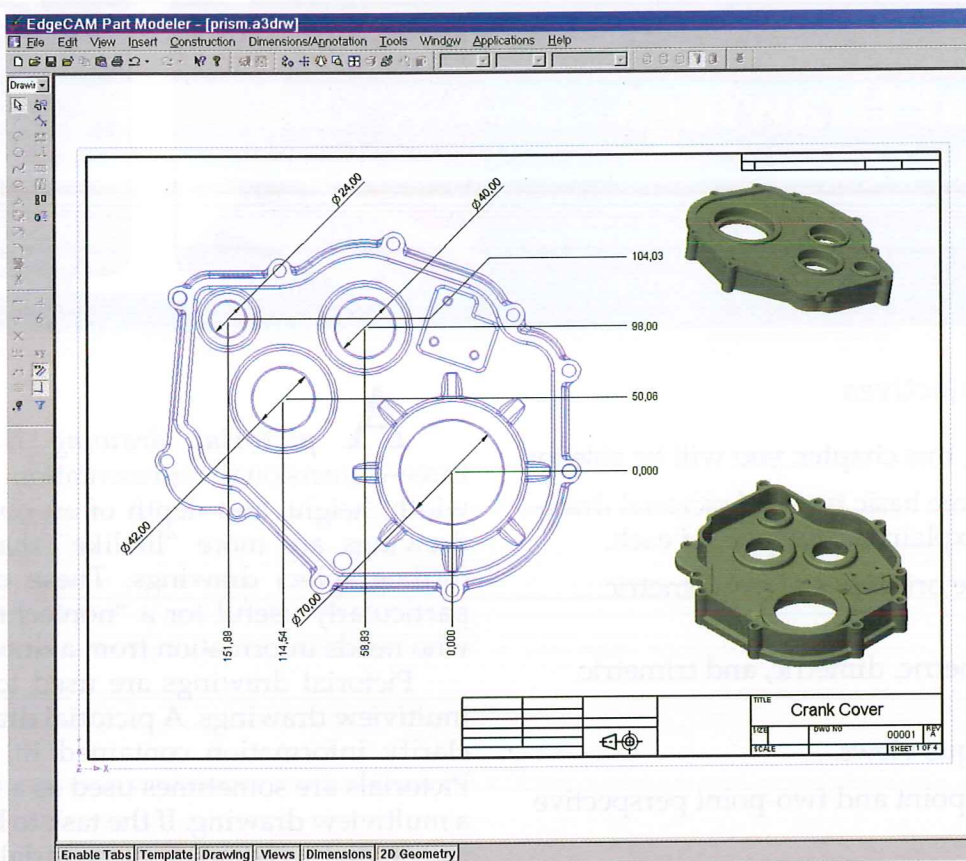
Pictorial drawings help clarify the assembly of parts. (EdgeCAM/Pathtrace)
